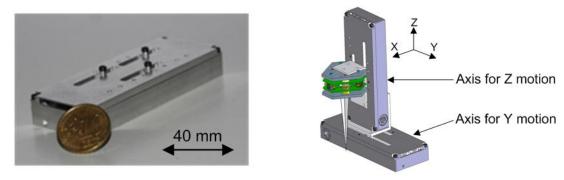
Left: Linear axis Right Force Sensor assembled on two linear axes
